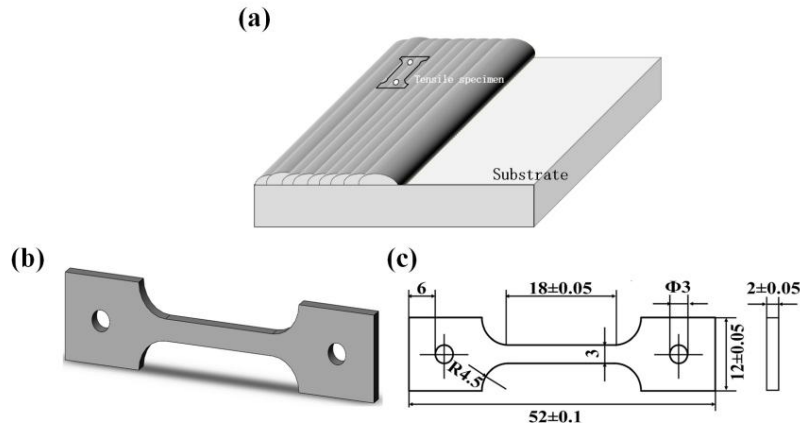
(a) Cross-sectional view; (b) 3D view of the tensile specimen; (c) Dimensions (mm)
